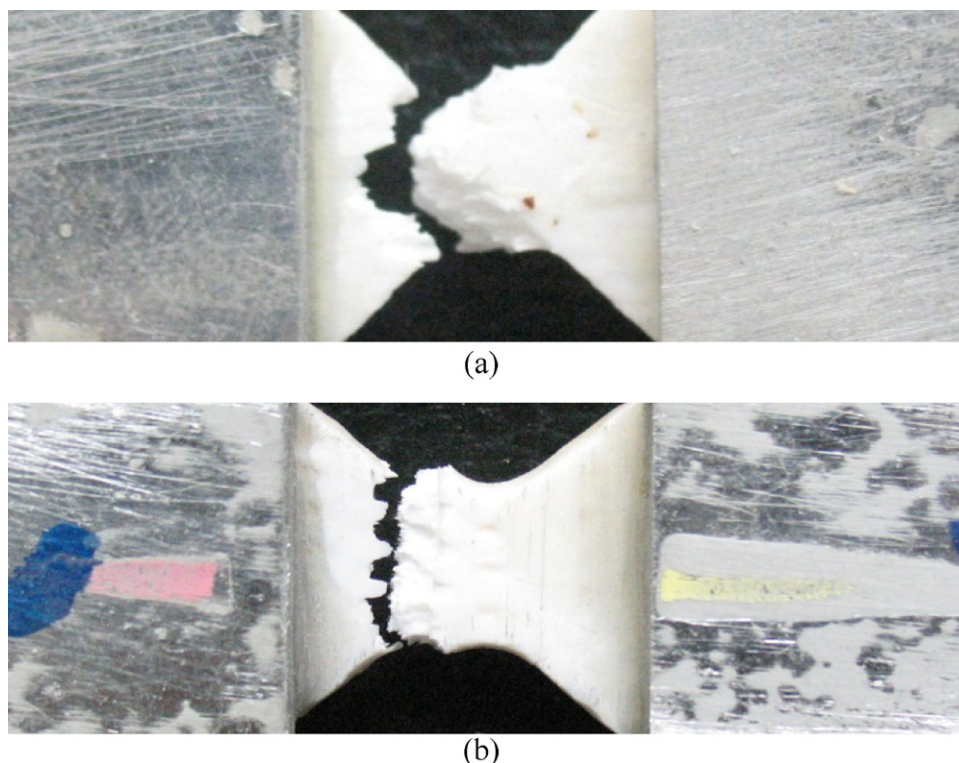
Photograph of the tested Iosipescu specimen of 3D and 2.5D composite. (a) 3D four-directional braided specimen. (b) 2.5D (shallow straight-joint) specimen.
